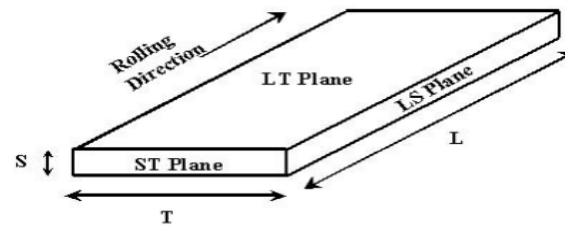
Labelling Scheme, LT plane: rolling surface, ST plane: perpendicular to rolling direction, and LS plane: parallel to rolling direction
